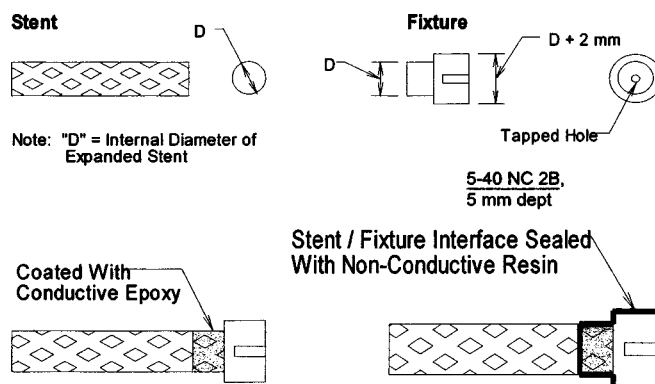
Diagram for Assembly of Stent-Holding Fixture
